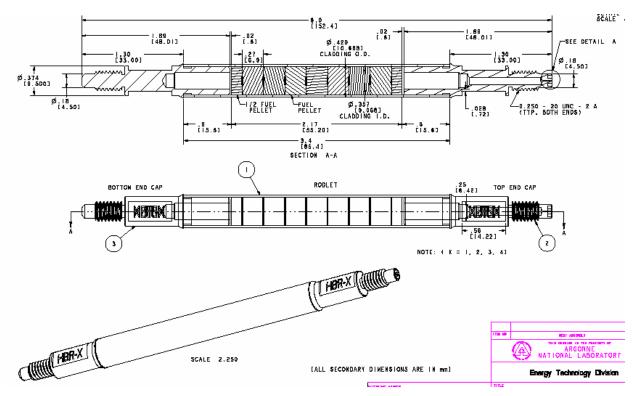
H.B. Robinson Spent Fuel Test Rodlet Design
